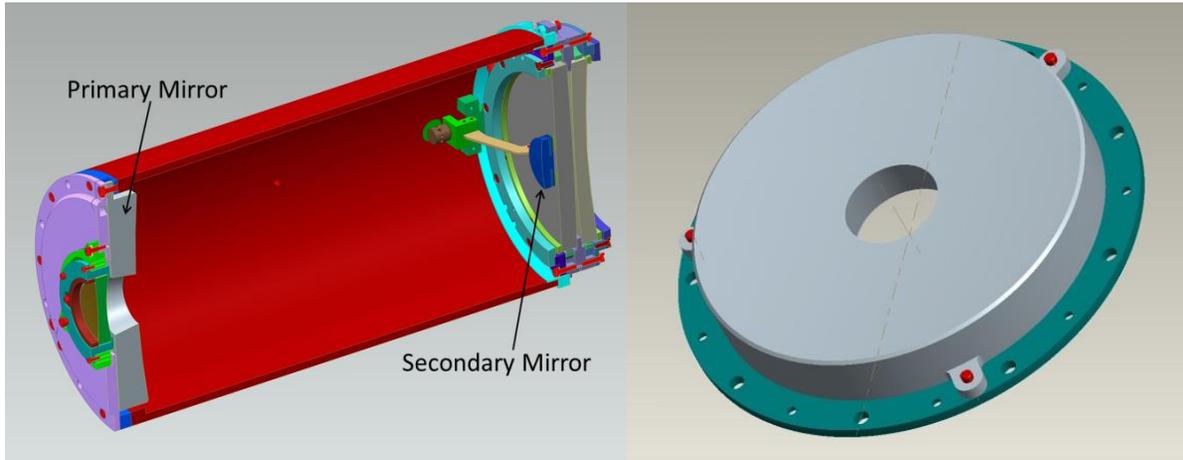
Mechanical layout of the LUCI camera-optics (left) and of the primary mirror assembled on a mounting plate (right).
